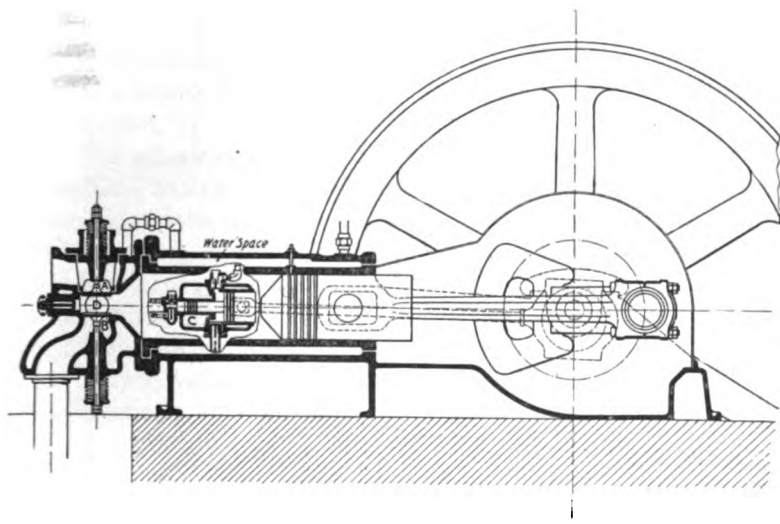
LONGITUDINAL SECTION OF OIL ENGINE
